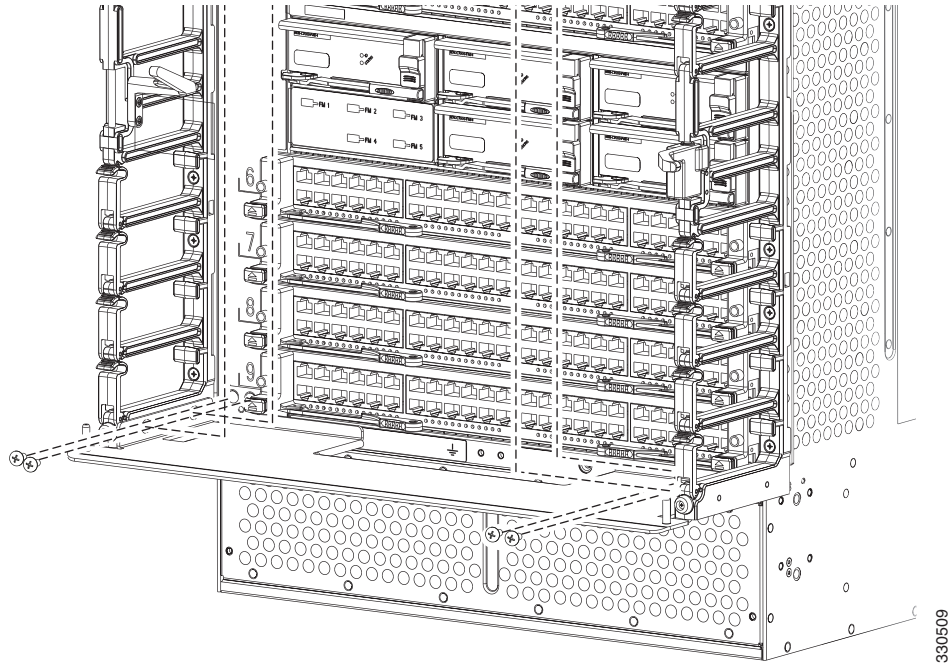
Positioning the Hinge Bracket to the Cable Management Frames and Chassis
